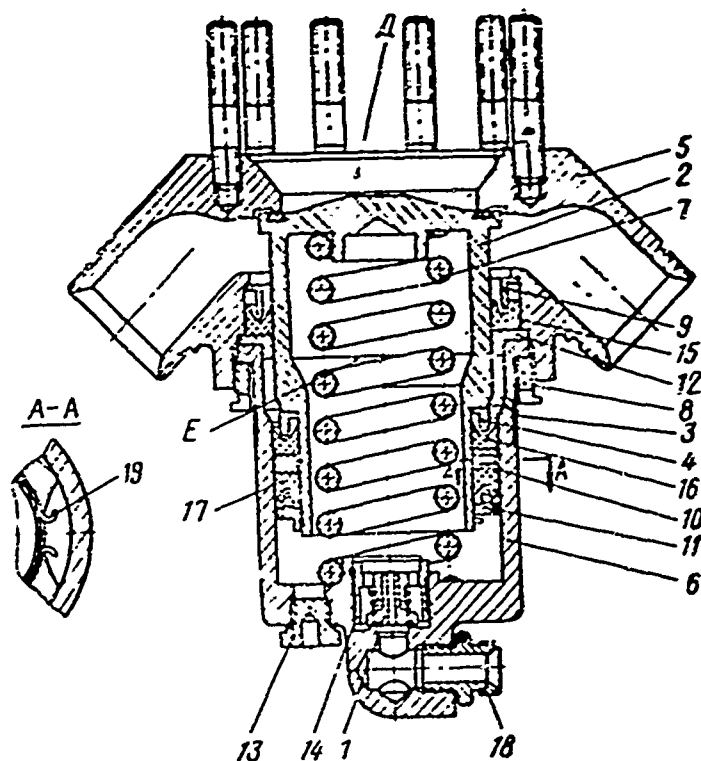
Main fuel valve: A - liquid cavity (inlet); E - controlling cavity; 1 - check valve; 2 - bushing; 3 - rubber ring; 4, 9, 10, 11, 12 - rings; 5 - housing; 6 - cover; 7 - spring; 8 - connector nut; 13 - plug; 14 - check valve housing; 15, 16, 17 - sealing rings; 18 - connector tube; 19 - gasket.
